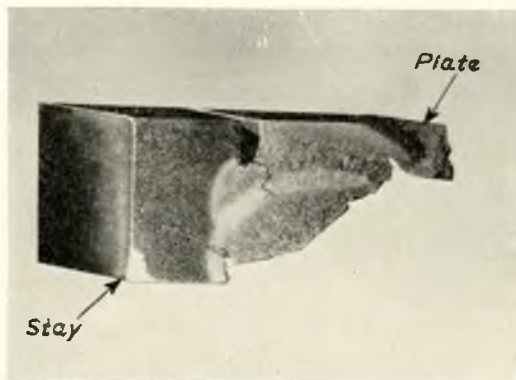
Undercutting at boiler stay fillet weld
